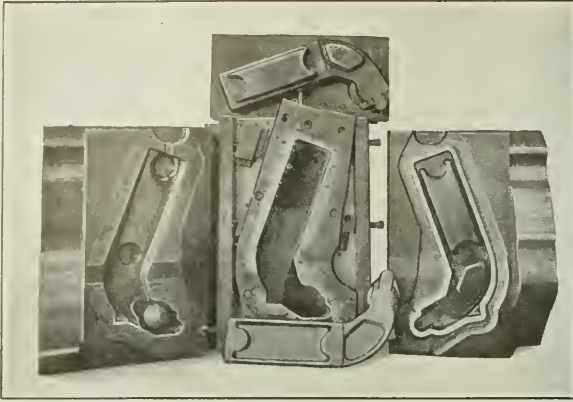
Drop-forging Dies for Radius-rod Bracket shown in Fig. 11
